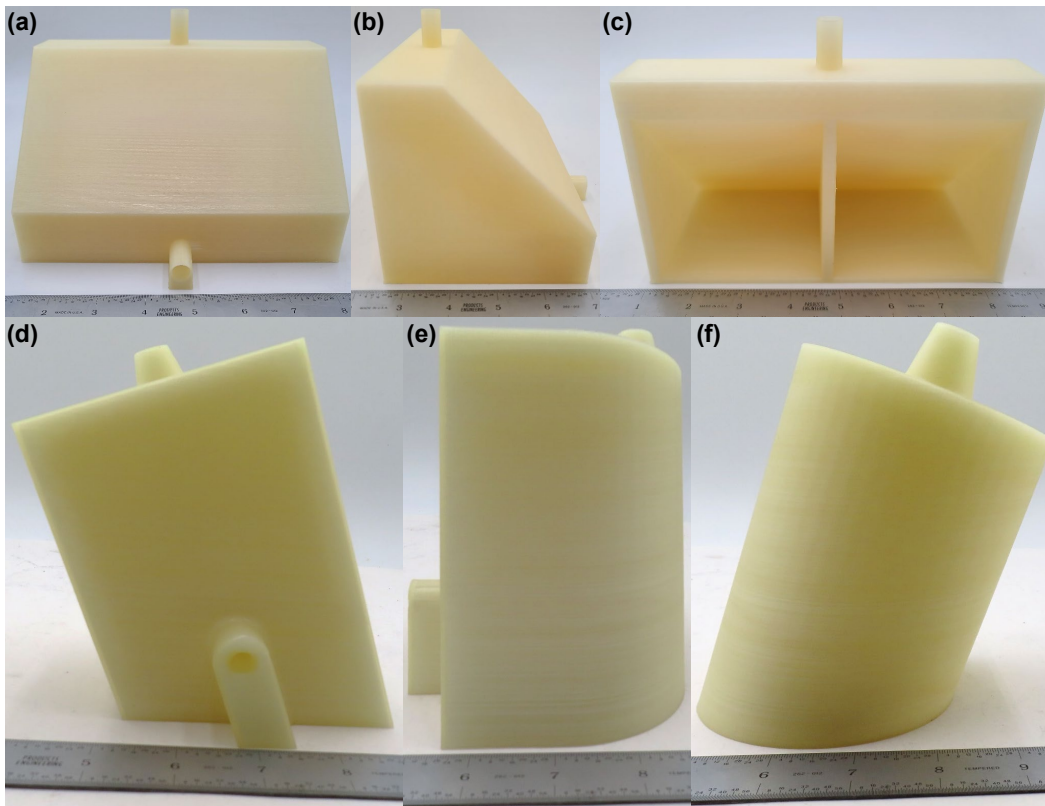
3D-printed BVOH molds for the bus bar cover assembly and resilient mount: (a) bus bar cover assembly mold front view (Parts 1 and 2 are identical from an external view), (b) side view, (c) rear view, resilient mount front view, (e) side view, and (f) rear view.
